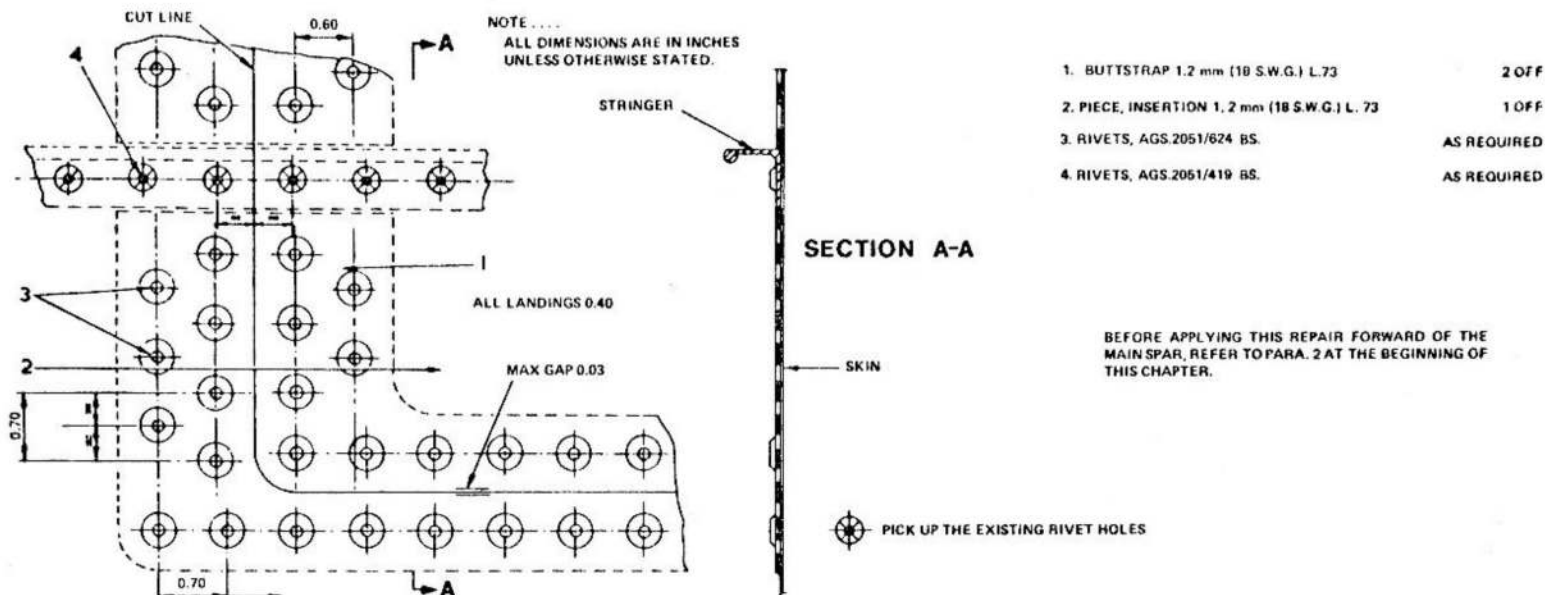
FLUSH SKIN PATCH IN INNER AND OUTER WING, INNER WING, UPPER, FORWARD OF MAIN SPAR, OUTER WING, UPPER AND LOWER, FORWARD AND AFT OF MAIN SPAR. OUTBOARD OF RIB 2
